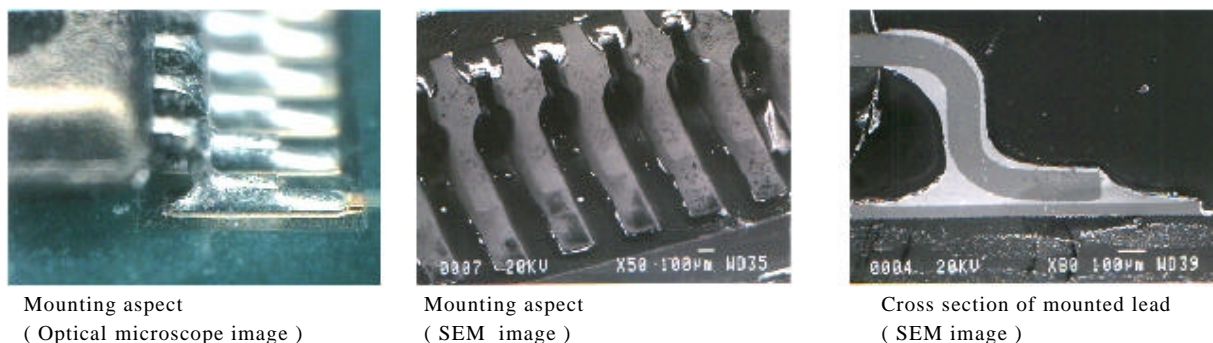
Appearance image (the optical microscope, SEM) and cross-sectional image (SEM) after mounting
